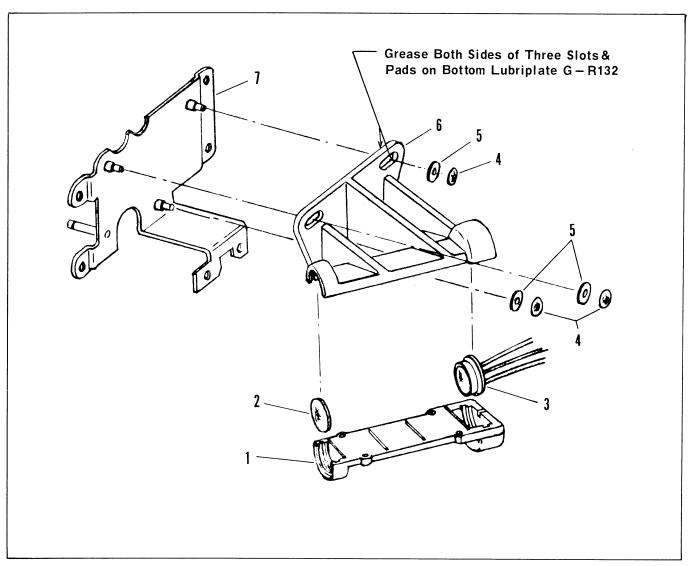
Autofocus Photocell Carrier and Bracket Assembly
